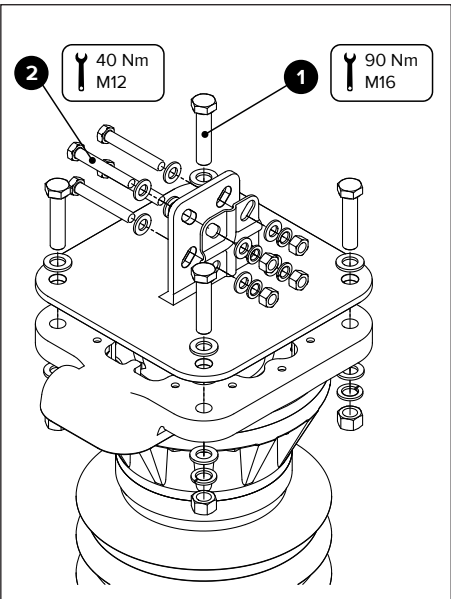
Flat terminal with clamping plate (Type A) / Abb. 6.1.1 Flachanschluss mit Gegenplatte (Typ A)
